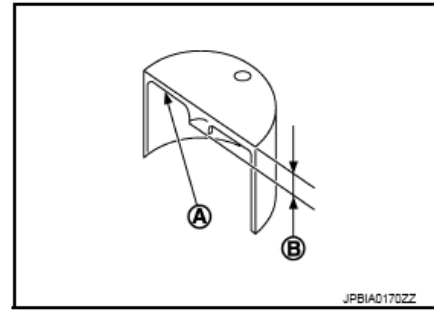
Identifying Stamp Mark And Valve Lifter Thickness
